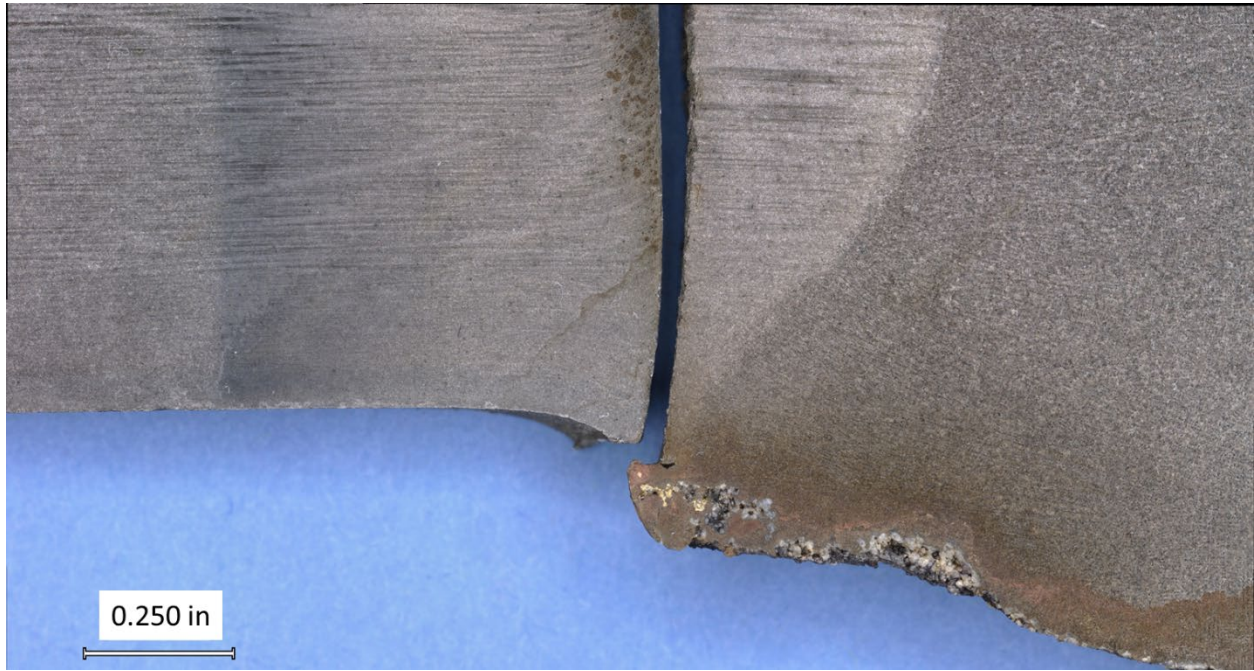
Closer view of the lower portion of the weld in the etched longitudinal section.
